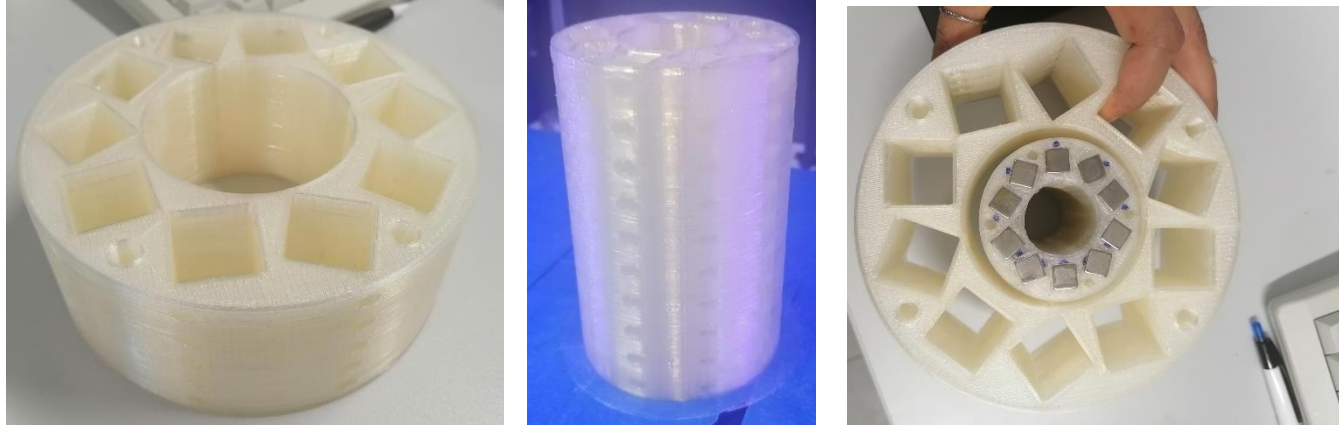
3D printed magnet circuit housing from PLA material.
